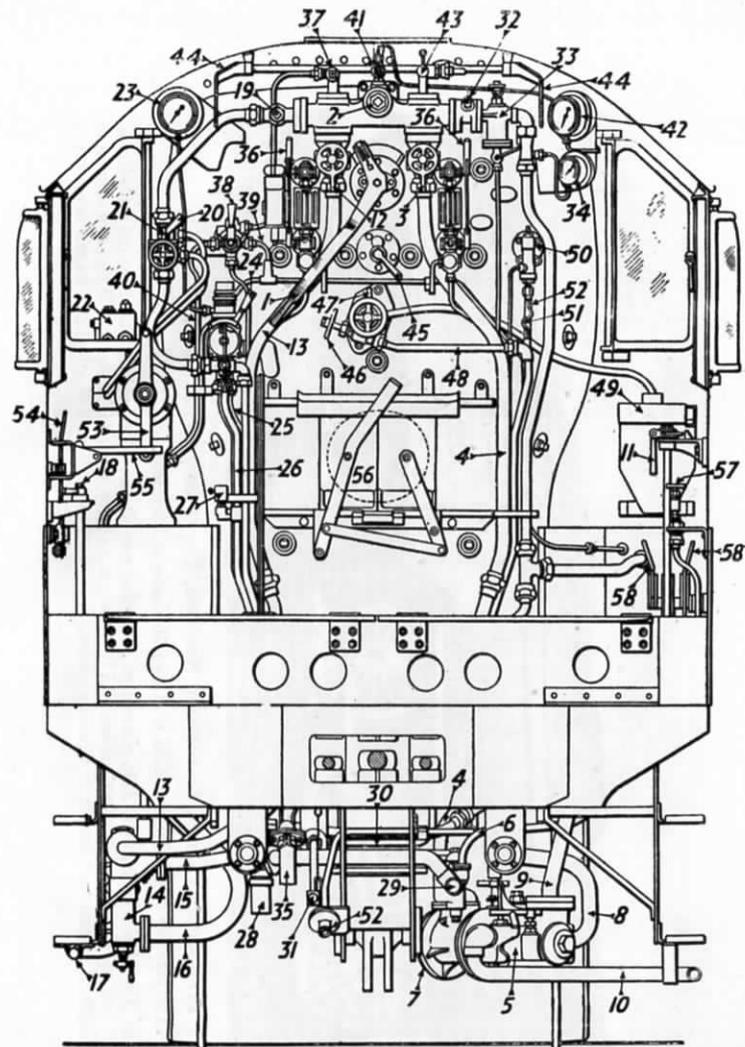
ARRANGEMENT OF FOOTPLATE FITTINGS:
